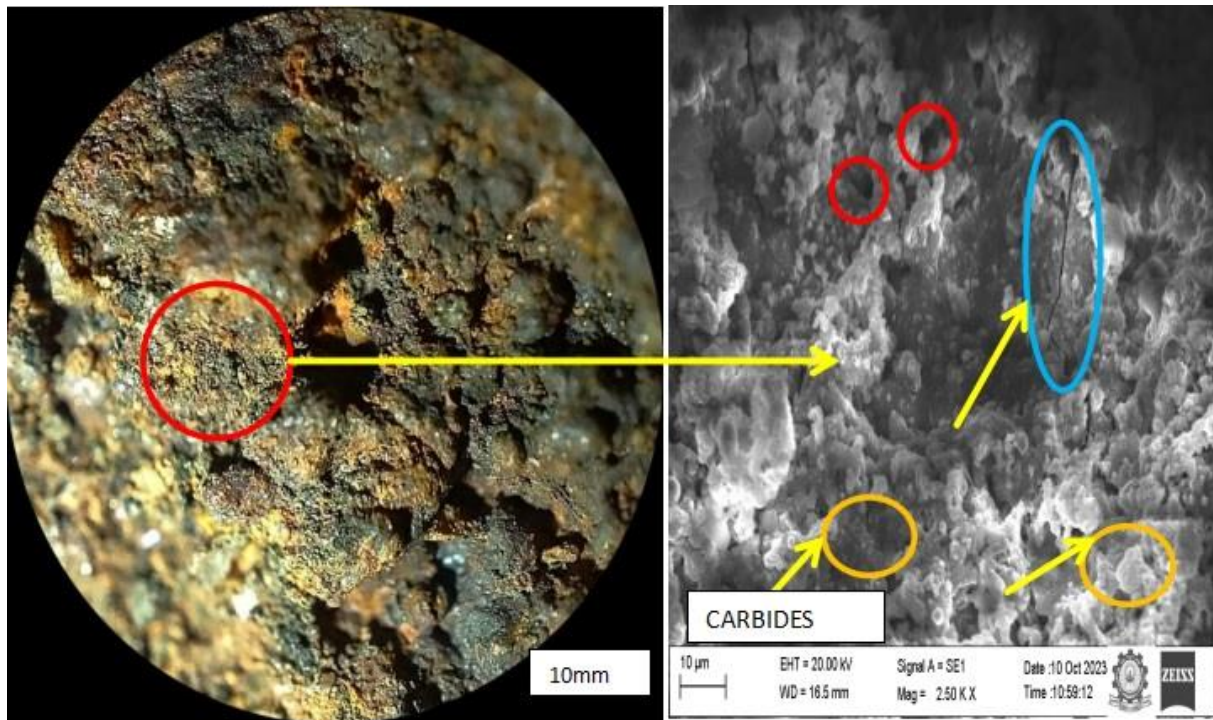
(a) Macroscopic fracture morphology and (b) SEM fracture morphology of GS-42CrMo4V steel, with appropriate scale bars.
